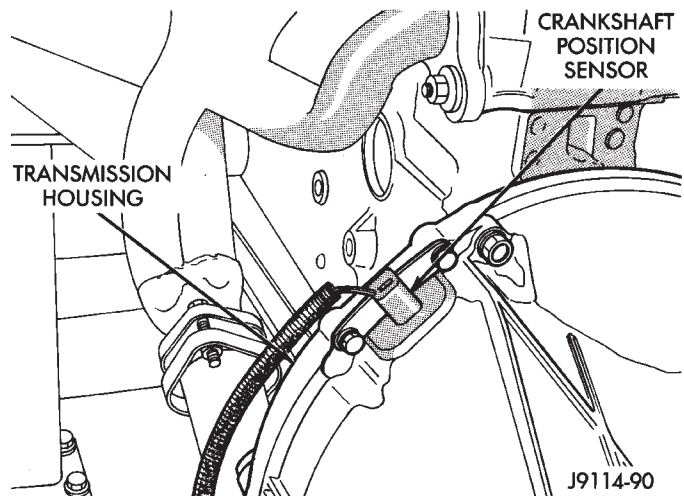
Crankshaft Position Sensor—4.0L 6-Cylinder Engine—All Except YJ models With Automatic Transmission
